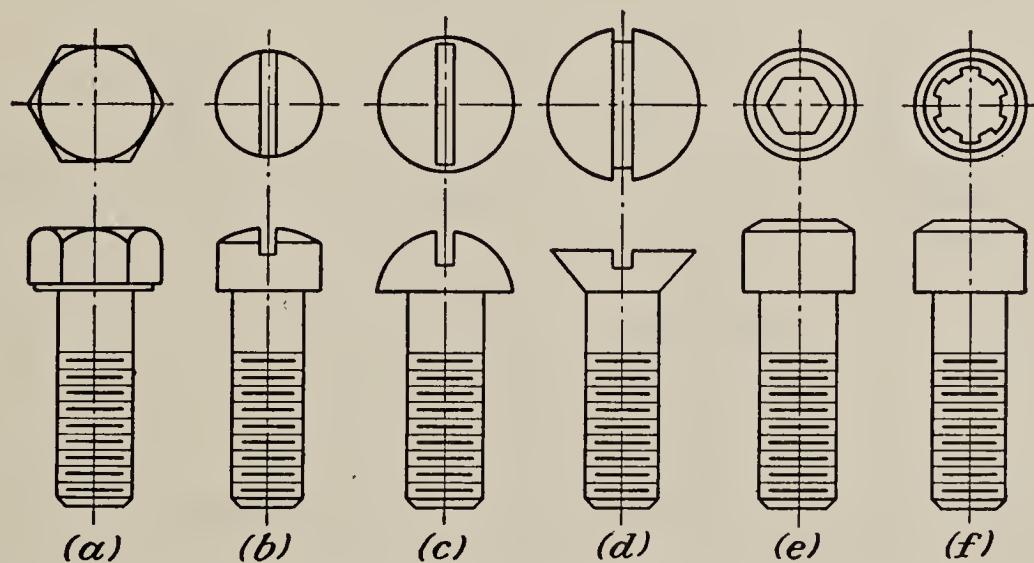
Cap screws with various types of heads; (a) hexagonal; (b) filister; (c) button; (d) flat; (e) hexagonal socket; (f) fluted socket.
